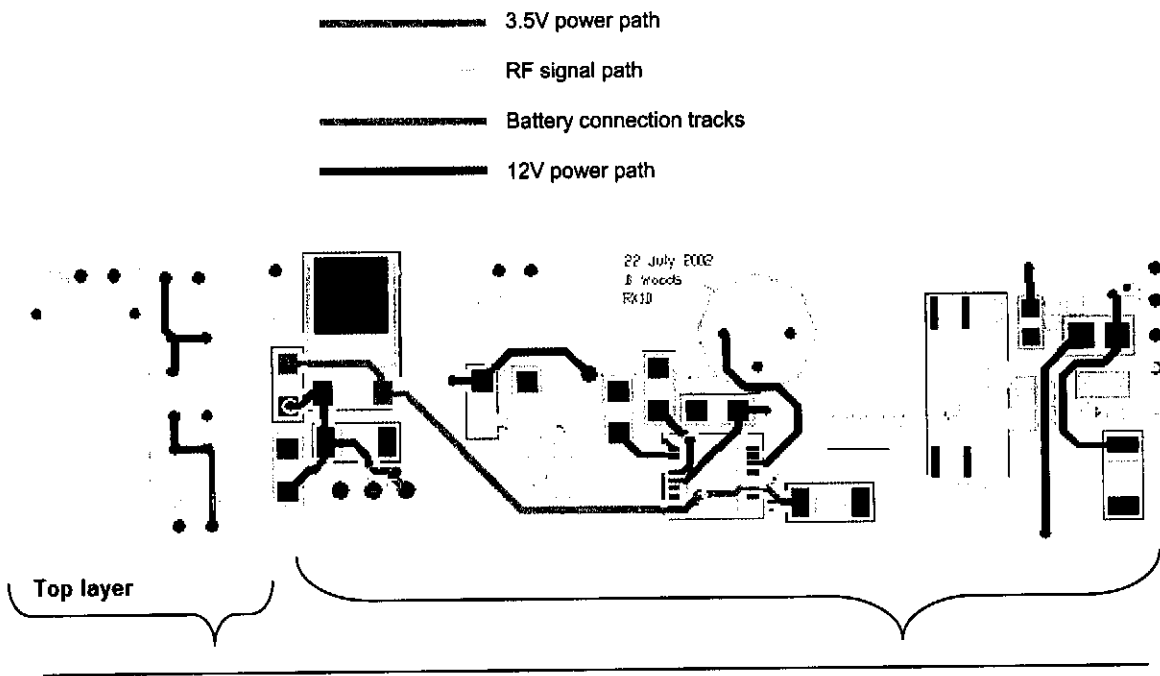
The top and bottom layers of a PC board layout of the prototype receiver circuit
